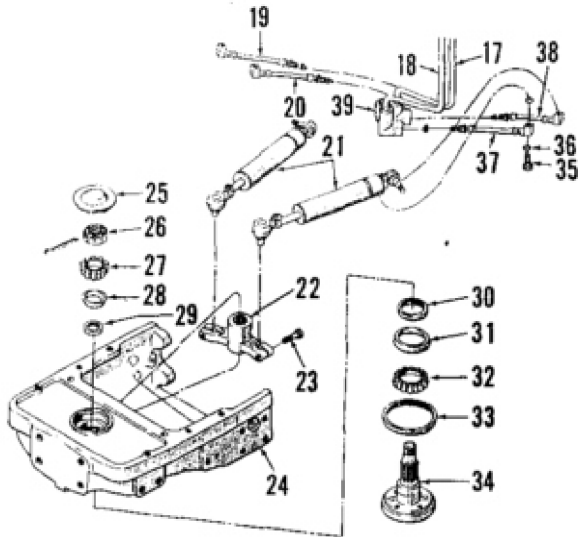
Exploded view of model 4200 pedestal, steering shaft and steering cylinders. Fluid lines (17 and 18) lead to "Hydramotor" steering unit.
